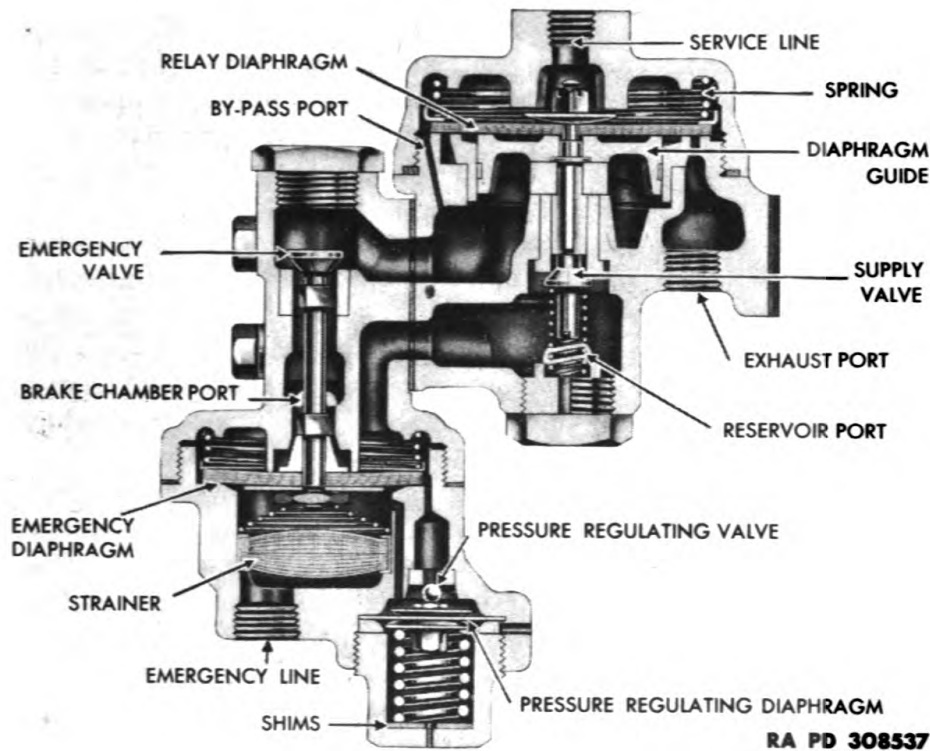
Sectional View of Relay Emergency Valve with Pressure Regulating Valve
